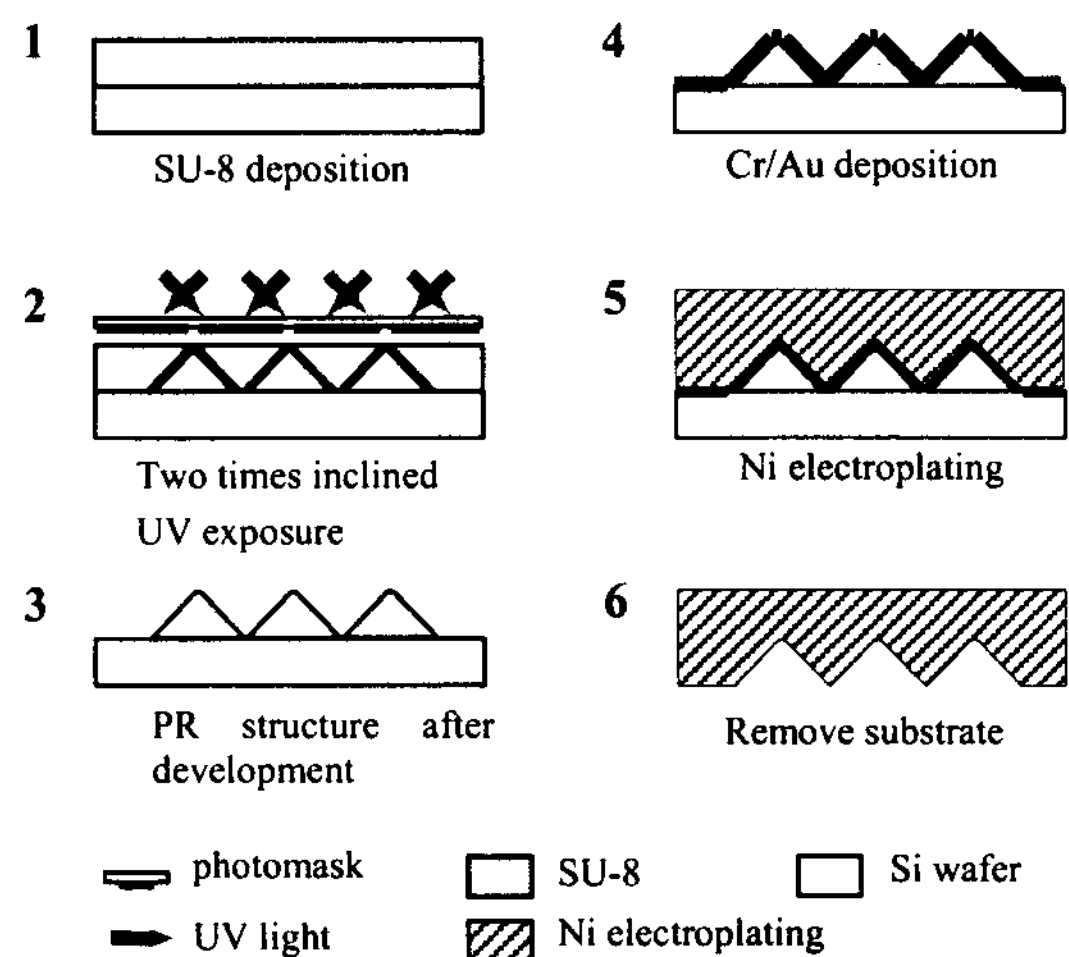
Fabrication sequence of V-grooved mold insert for LGP.
